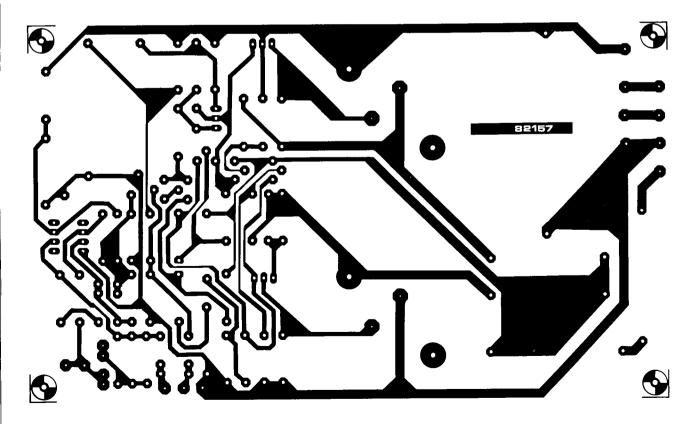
The printed circuit board for the power generator. All components are mounted on the board except for the mains transformer, fuse and mains switch. Since the output transistors are mounted on the printed circuit board with heatsinks (see text), the cover of the housing must allow sufficient ventilation.
